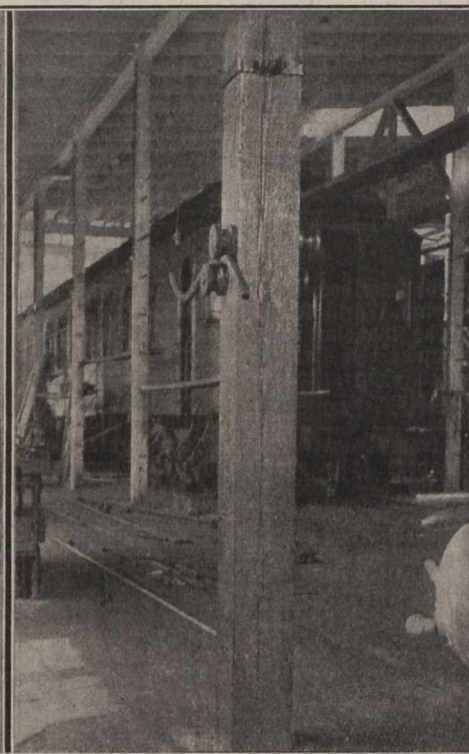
Mechanism for Grinding in the Dry Pipe.
